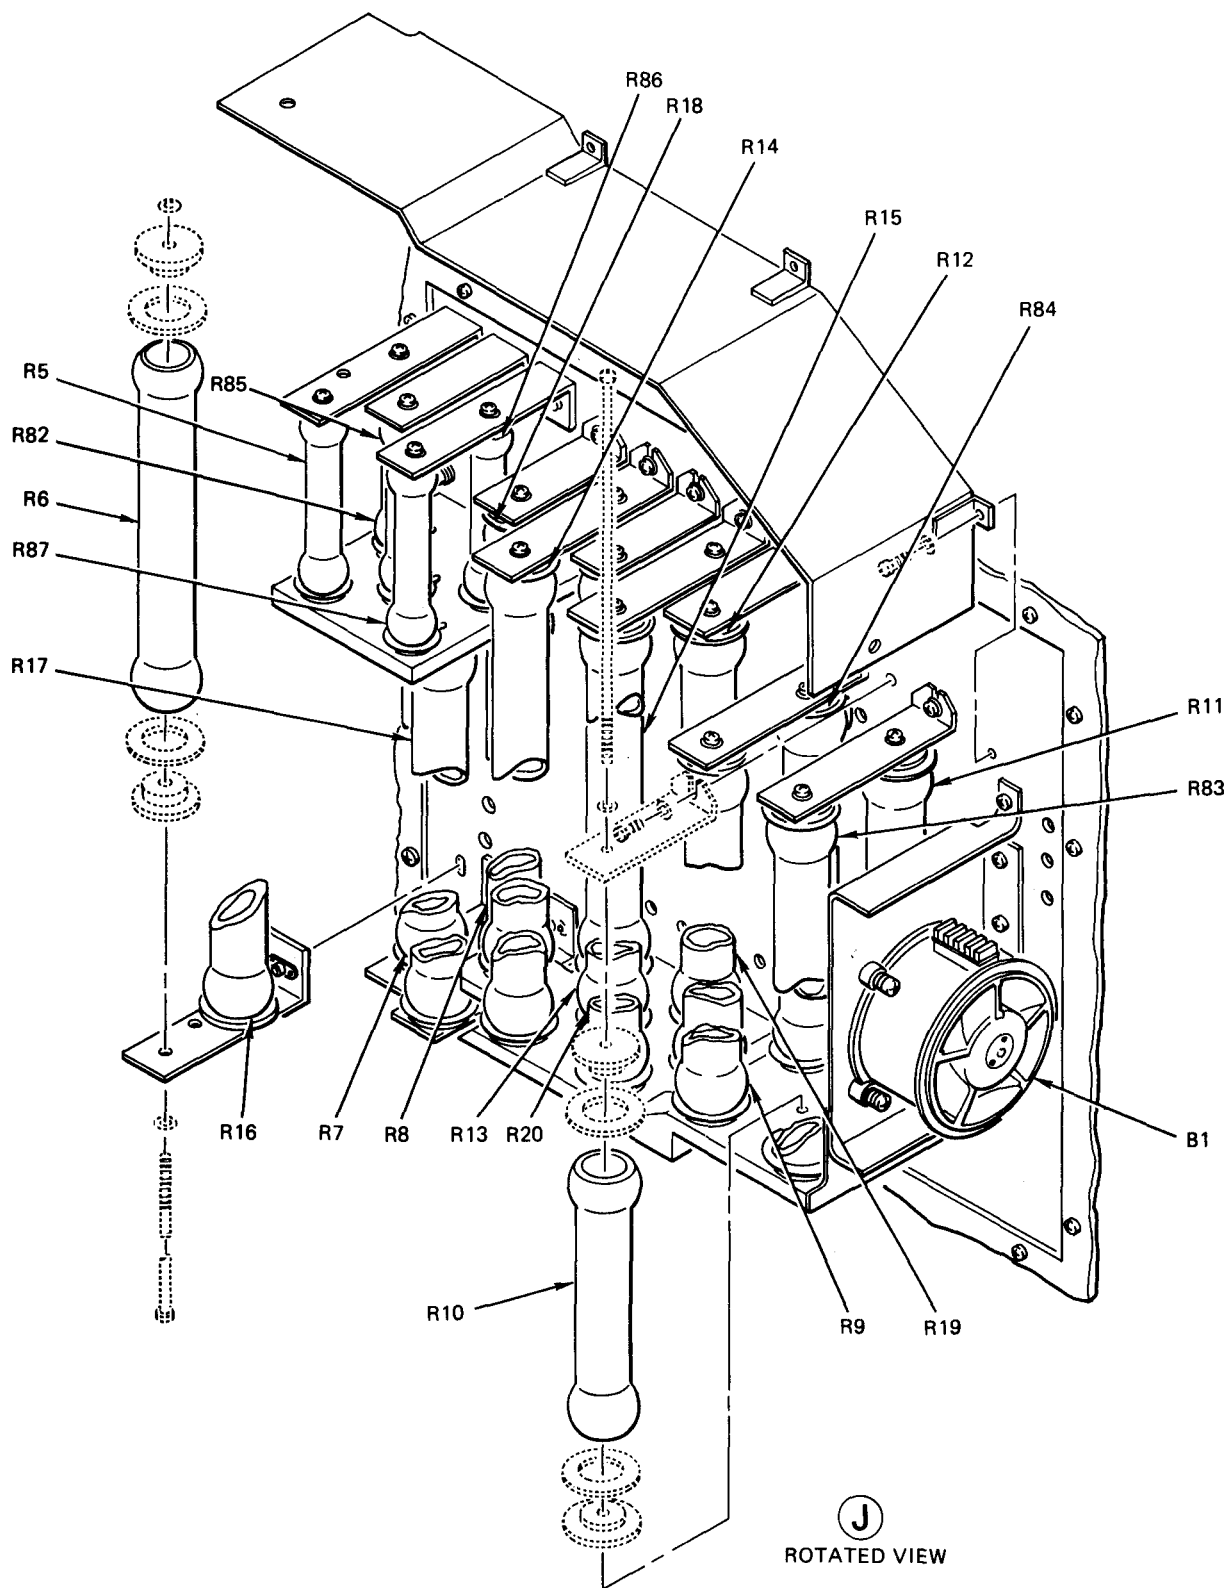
Power Supply Test Set Parts Location Diagram (Sheet 6 of 6)
